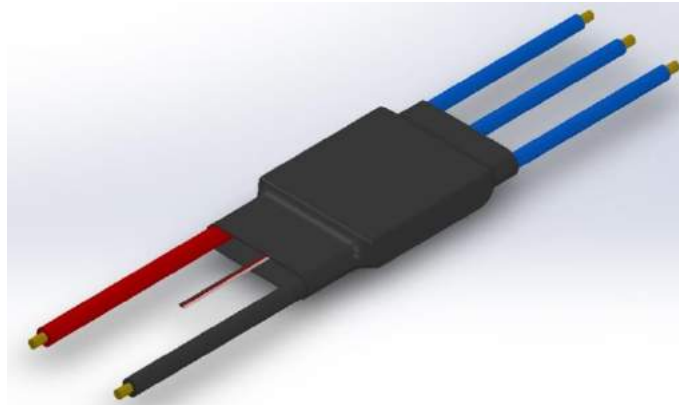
Solid Model Drawing of ESC Used in Tricopter
